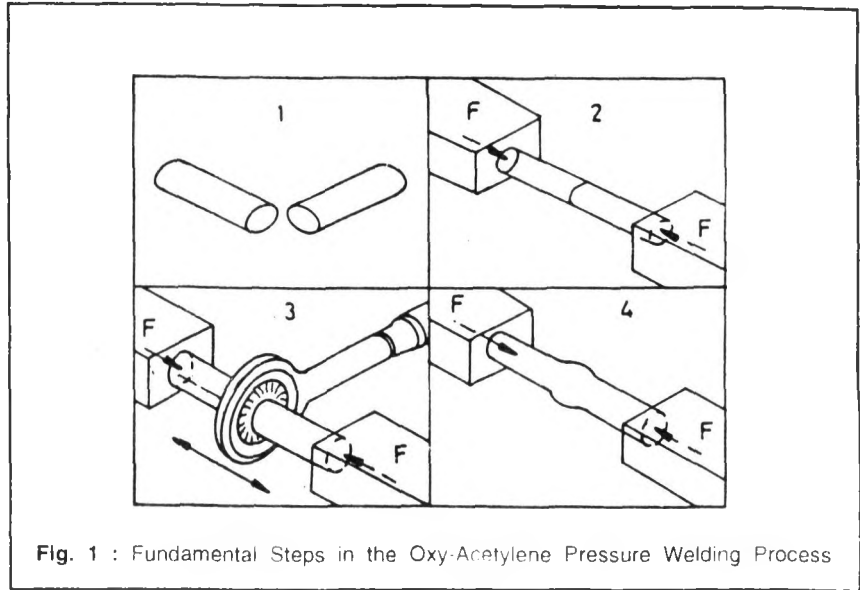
Fundamental Steps in the Oxy-Acetylene Pressure Welding Process
